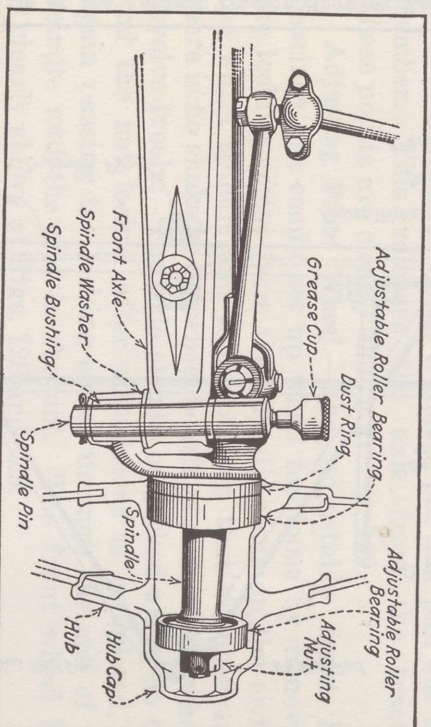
View of Fordson Tractor Front Wheel Showing Bearing Mounting.
